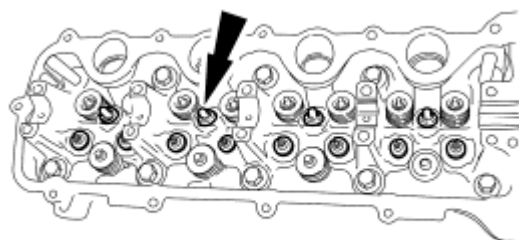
Locating Cylinder Head Remover/Installer Onto RH Cylinder Head
